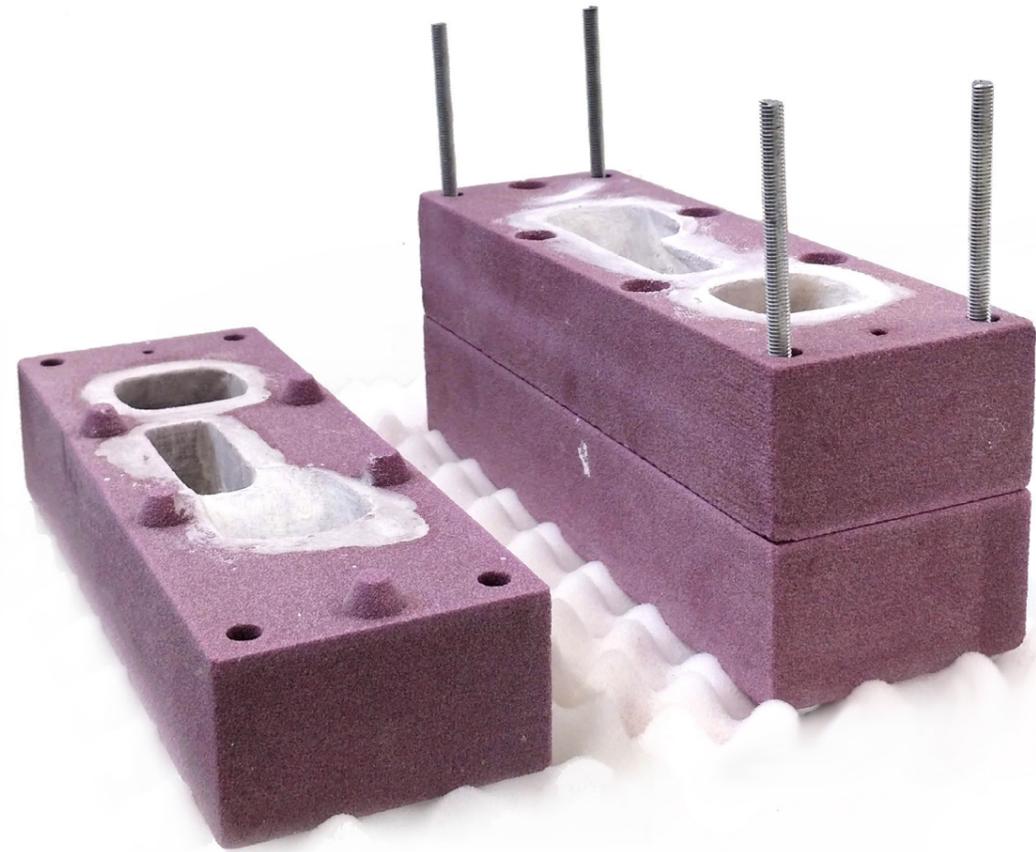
t: Crystal cast coated mould prepared for casting inside the kiln
